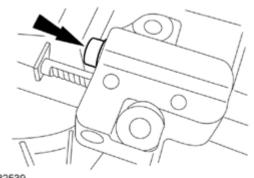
Locating Timing Chain Tensioner Arm Courtesy of FORD MOTOR CO.
